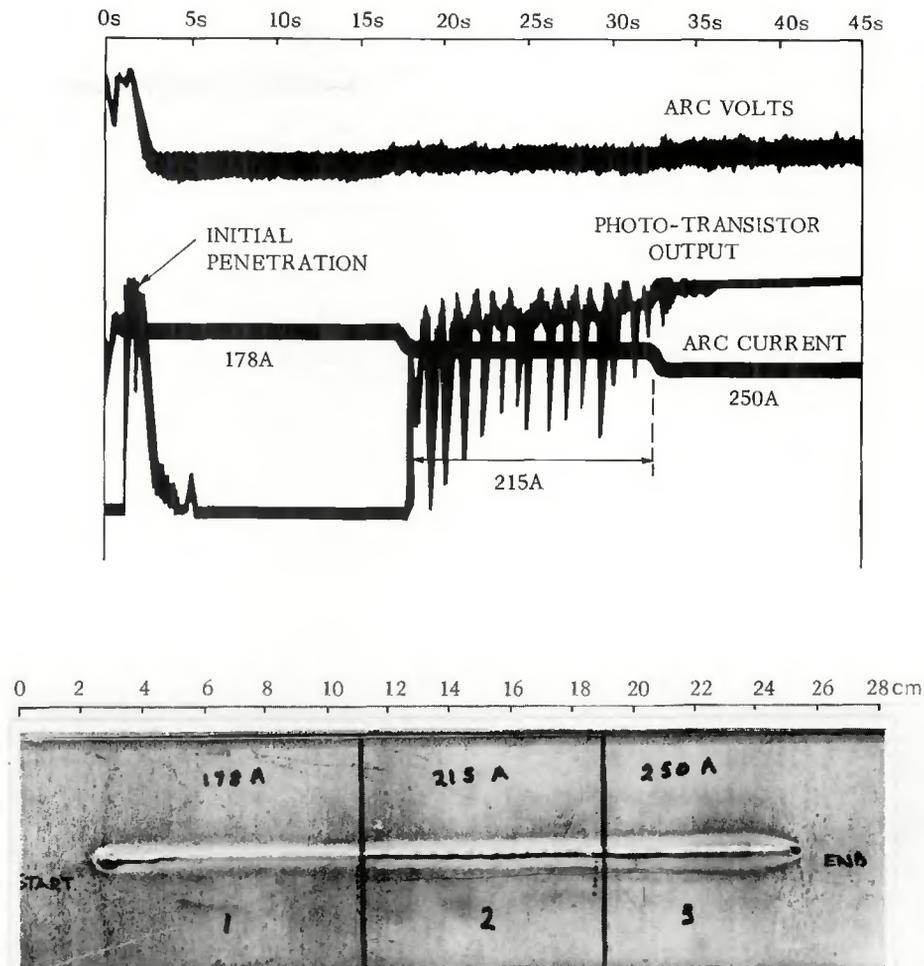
Comparison of sensor output (top) with the weld bead shown below. Travel speed 5 mm/s; workpiece stainless steel 6.5 mm thick (Test No. 1)
